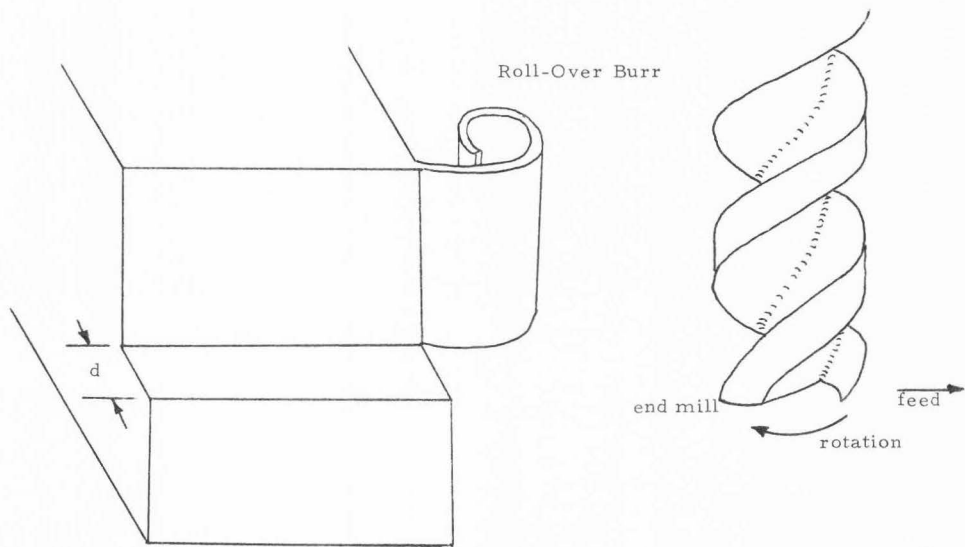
Illustration of a Roll-Over Burr produced by end mill
